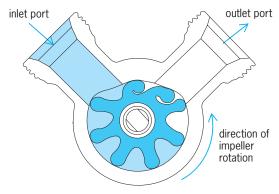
Rotary pump with a flexible impeller and off-set casing.
